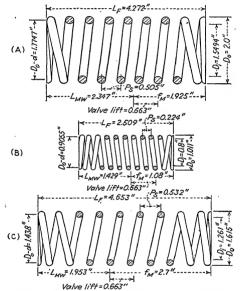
Layout for the valve springs in the Example of Par. 10-19. (A) Single spring for case (a). (B) and (C) Inner and outer springs for case (b).
